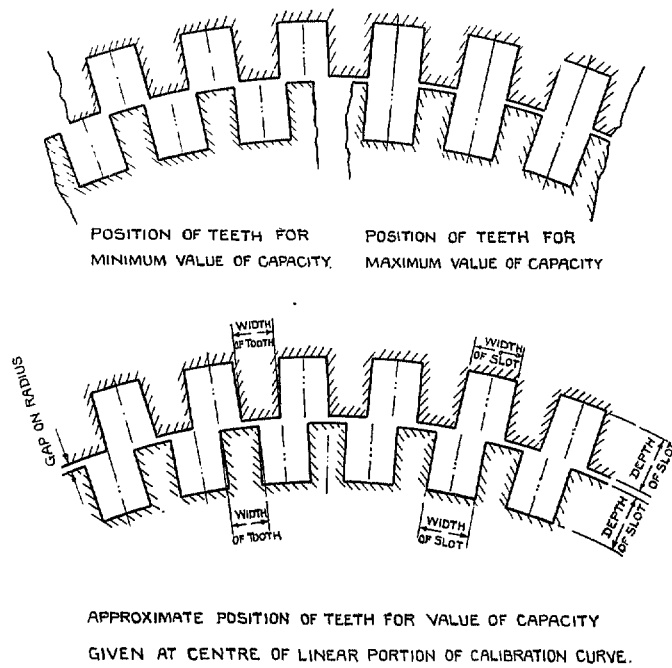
Enlarged view of serrations of R.A.F. condenser torsigraph.
